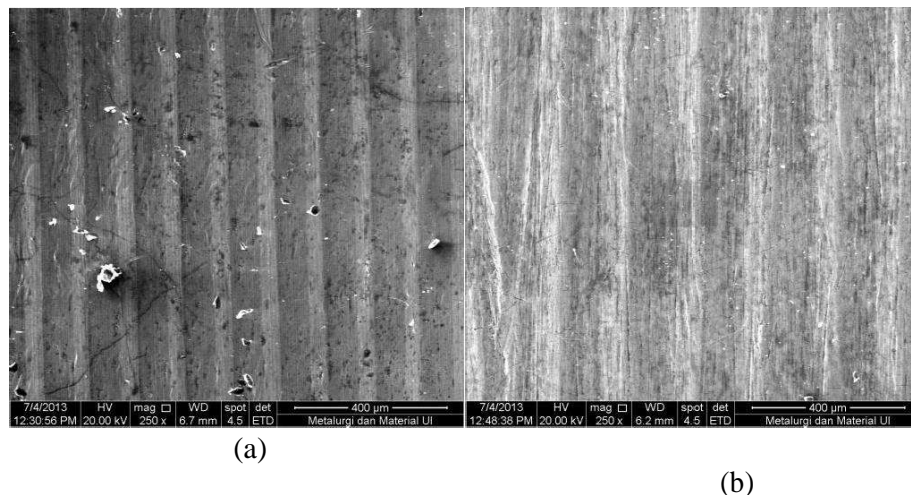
Topography (lay) of the machined surfaces: (a) f 0.12 mm/rev, and (b) f 0.15 mm/rev
